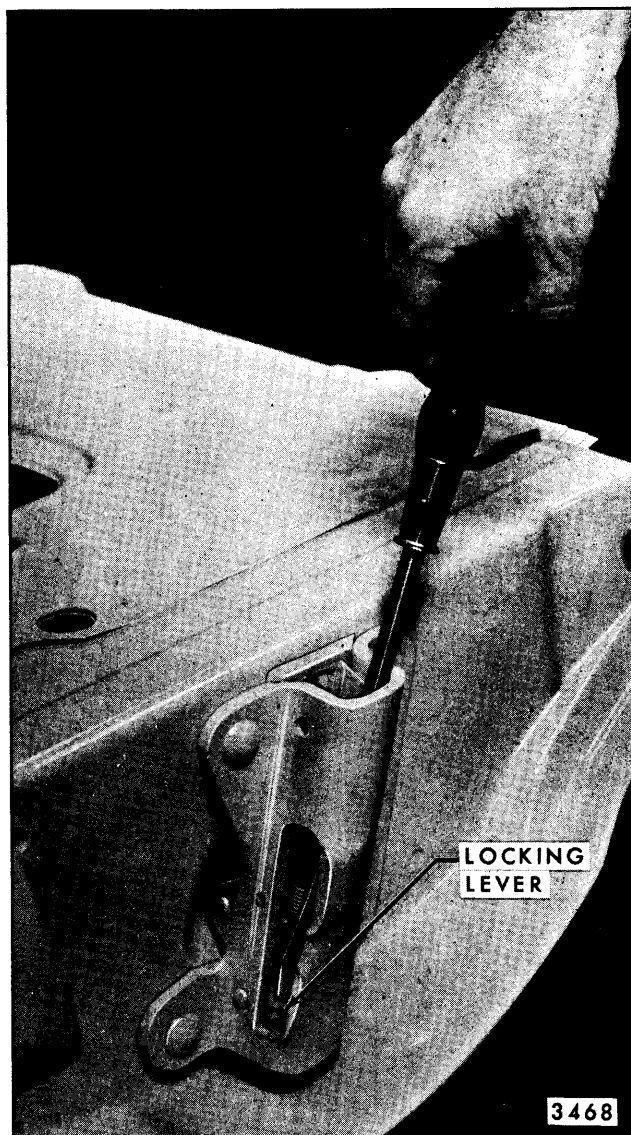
Dual Tail Gate Left Lock Engagement
